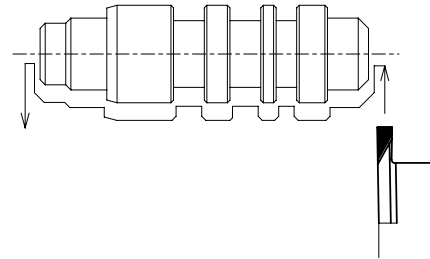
Example of the pass of KTKF toolholder + TKF-AS insert
